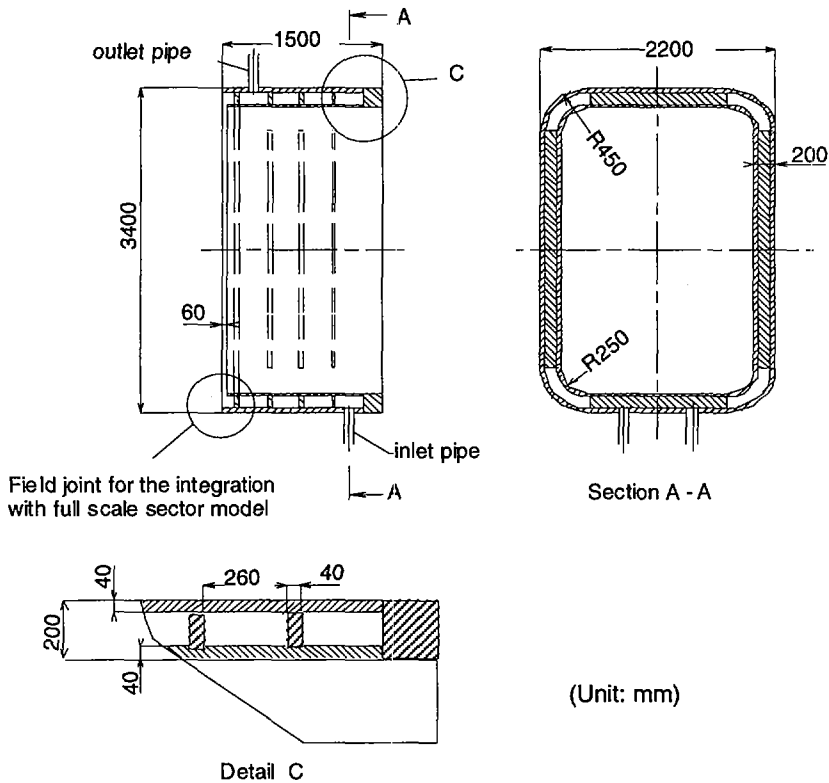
Full scale midplane port extension designed for prototype fabrication and testing.
